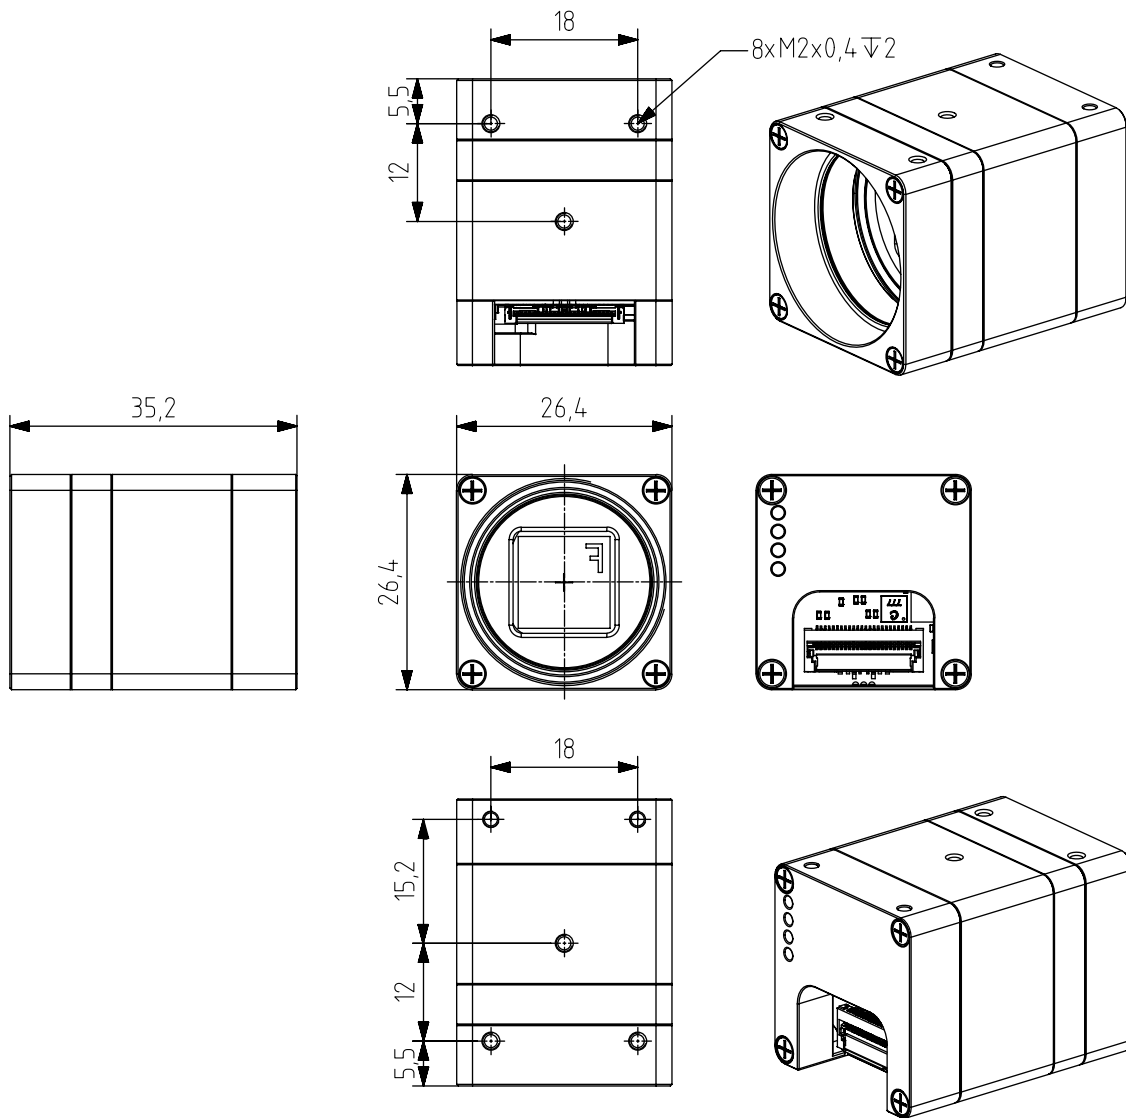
Dimensional drawing of MX042xG-CM-X2G2-FL (C-mount (with C-mount module B))
